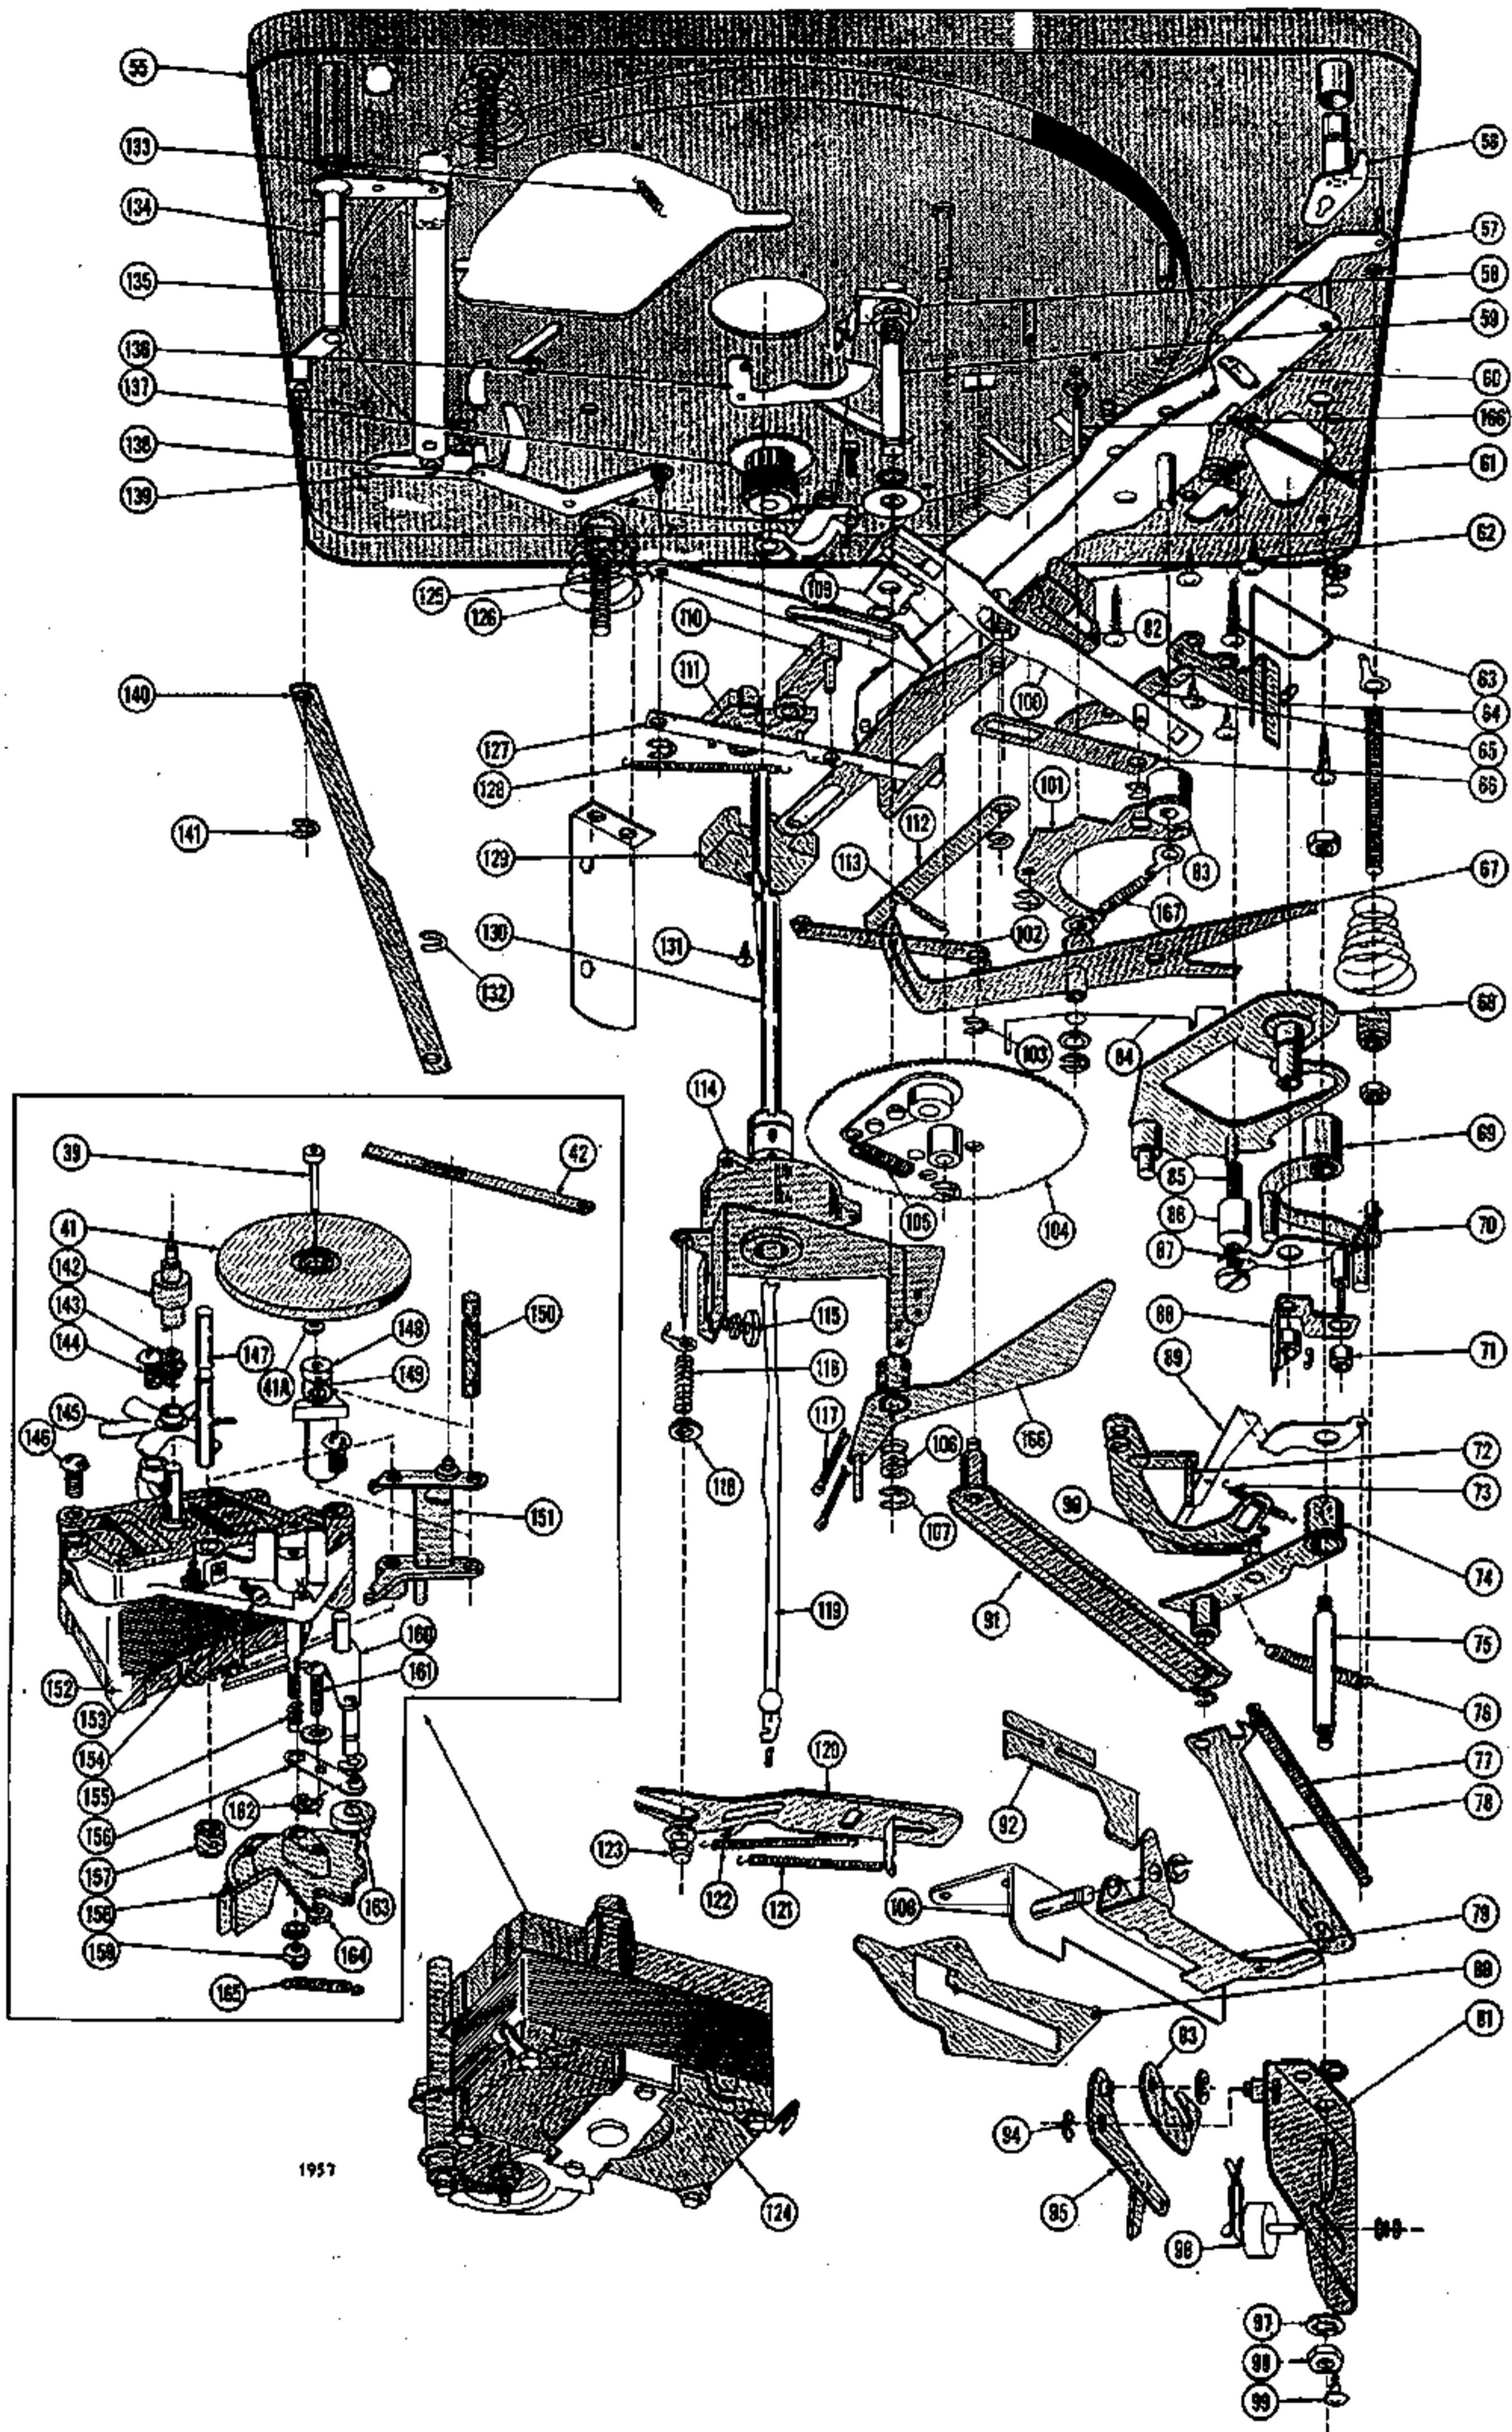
B. EXPLODED VIEW OF PARTS BELOW BASEPLATE.
